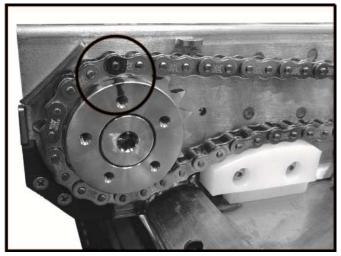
IDENTIFY LINK ALIGNMENT (RH SIDE SHOWN)
